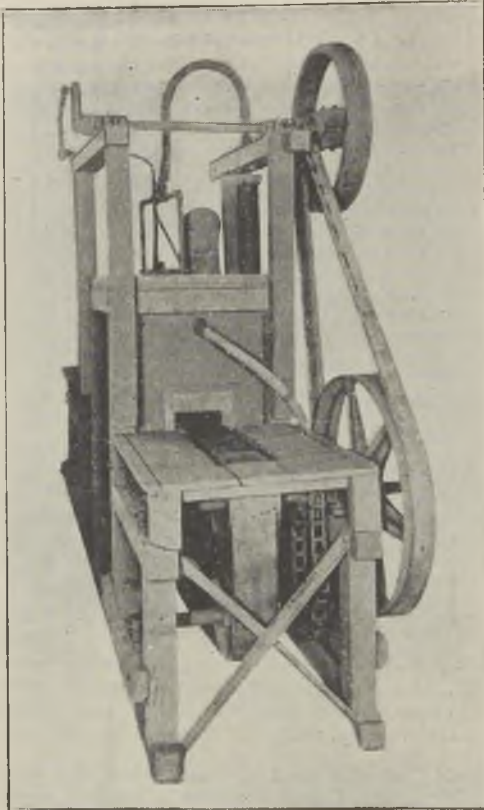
HORIZONTAL SAND CONVEYOR.
